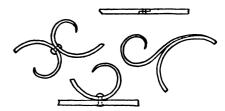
RIVETTING SCROLL WORK TOGETHER-
